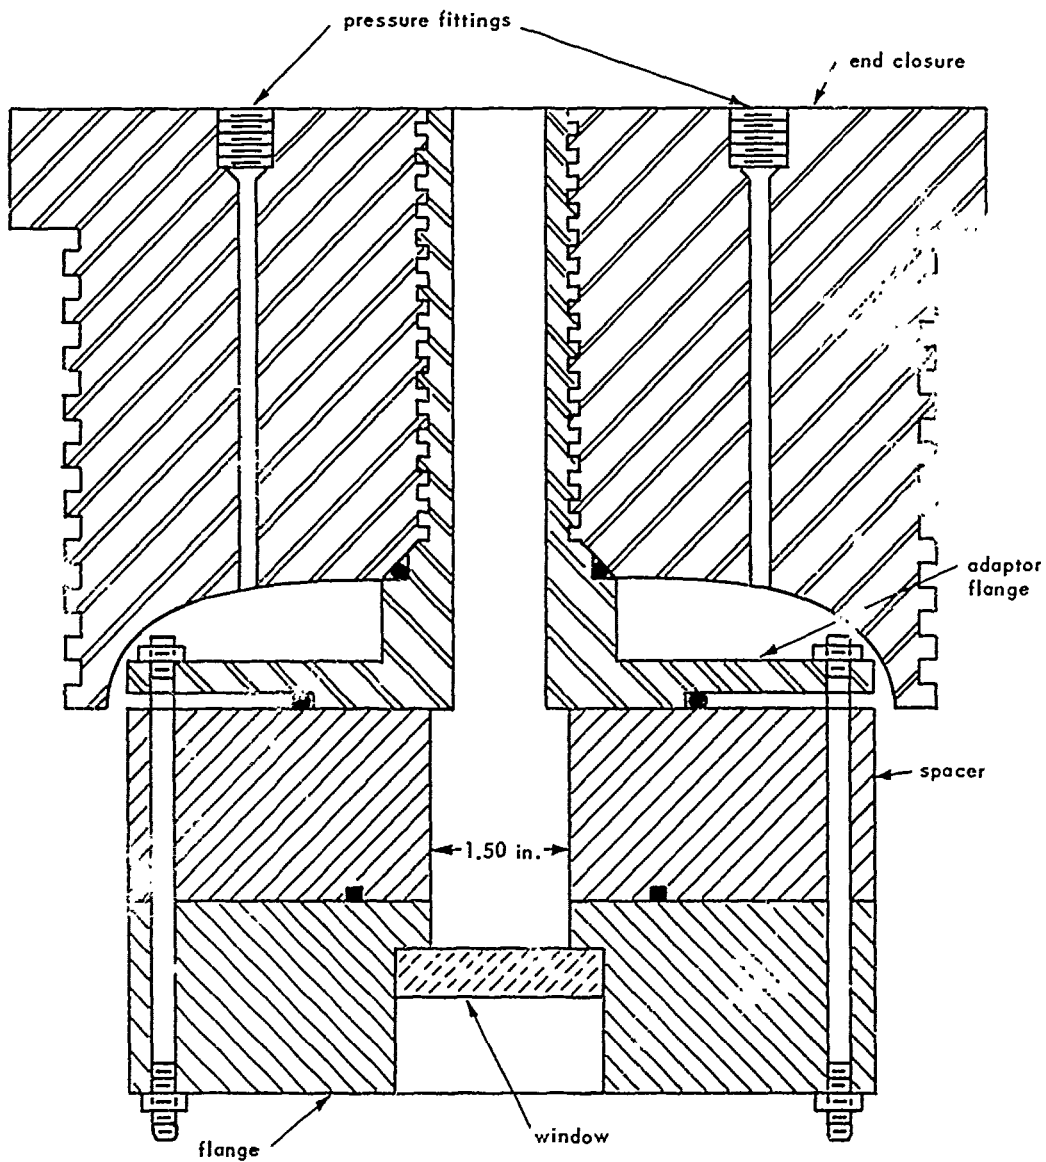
Schematic of a typical window and flange test assembly secured to the end closure of a Mk I 9-inch pressure vessel.
